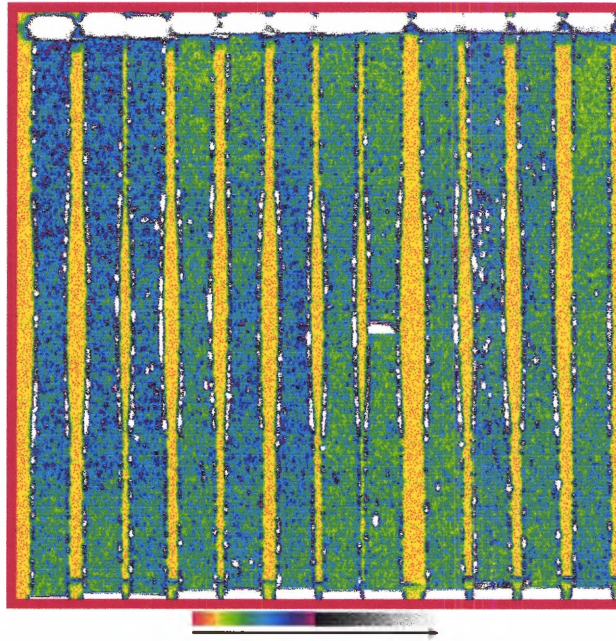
Backside of specimens C-scanned using surface wave technique. Specimens in sequential order from left to right. Straight-sided specimen placed at right end.
